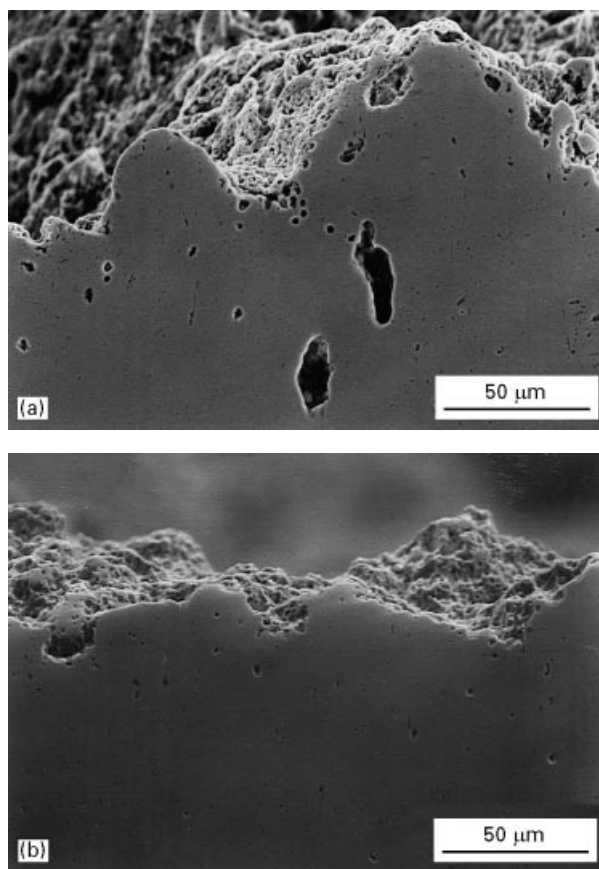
Voids below the fracture surface of tensile specimens of (a) the base material 20 MnMoNi 5 5, (0.003% S); (b) the shape-welded material 10 MnMoNi 5 5.
